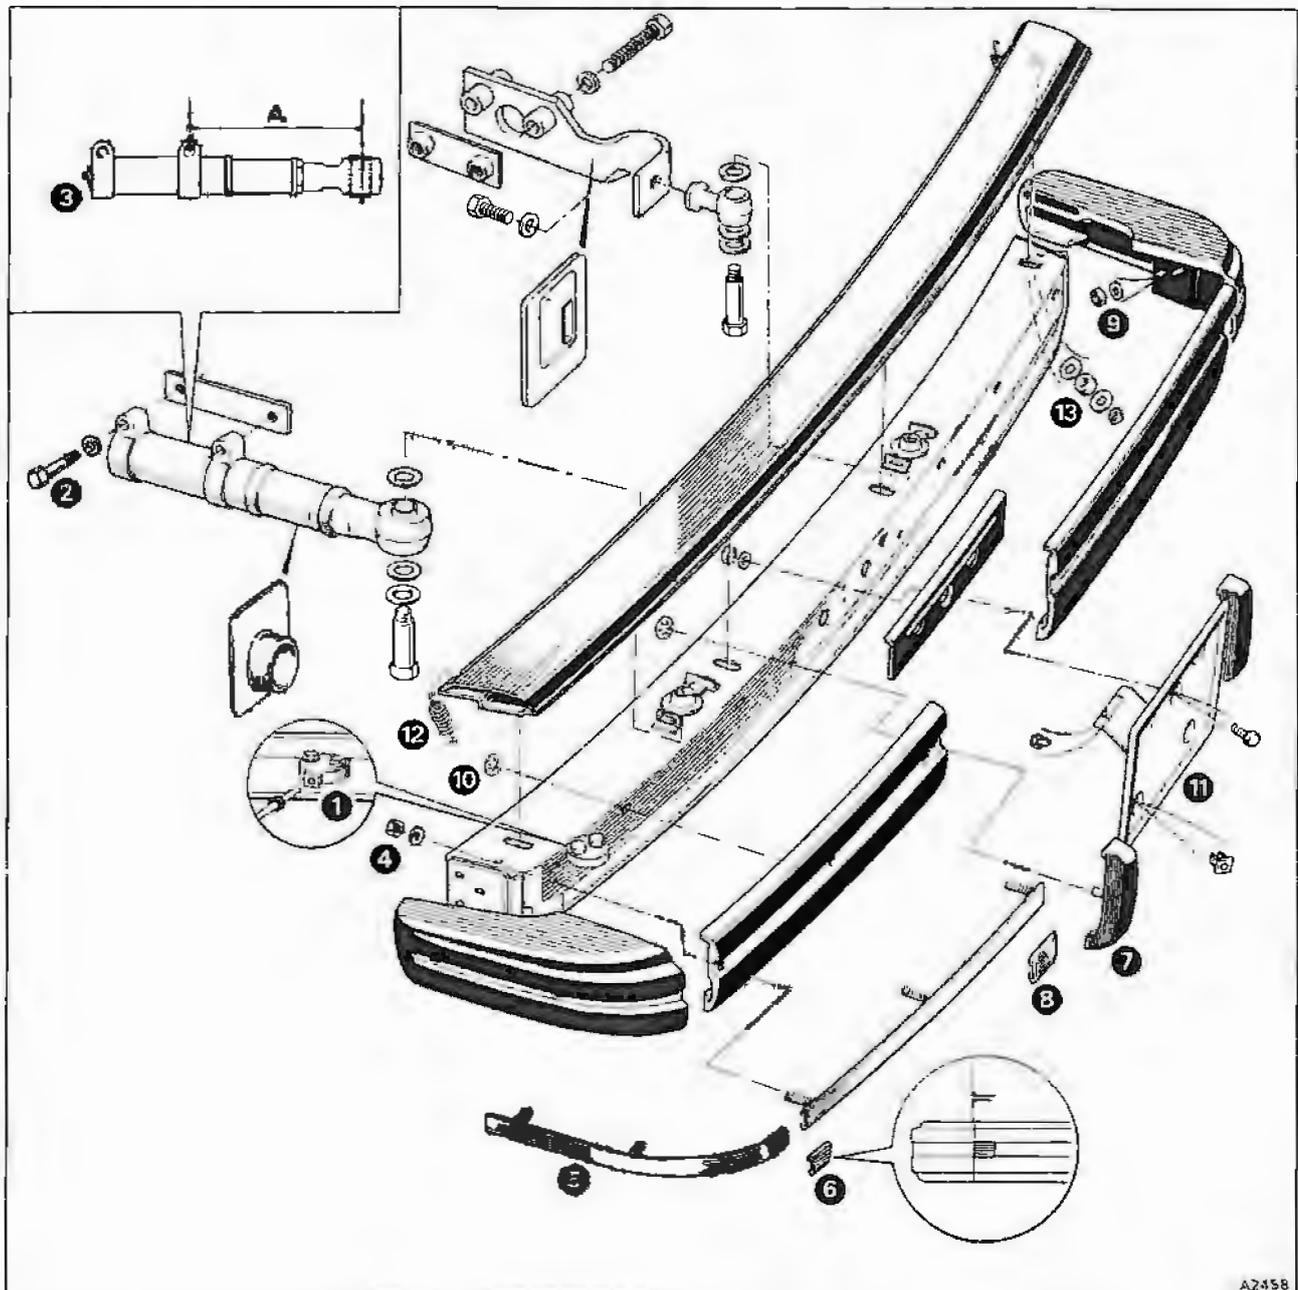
Front bumper assembly (incorporating a square type number plate)
